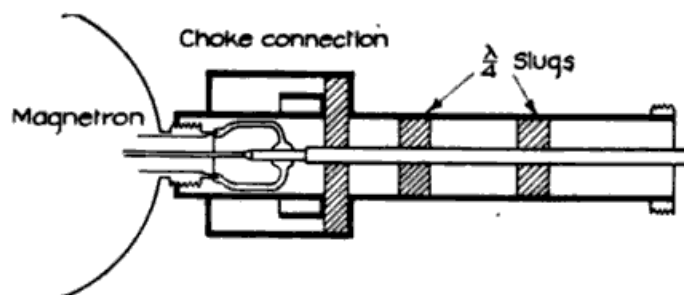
Coaxial output transformer, for a low-power magnetron.
